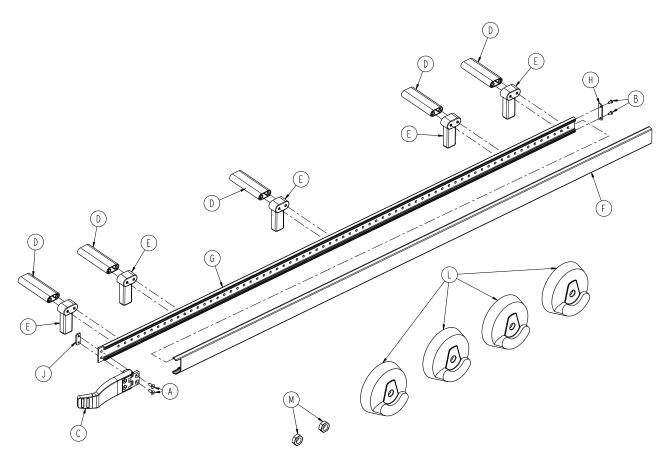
Optional Wheel Guide Kit Components - 6390-027-000
